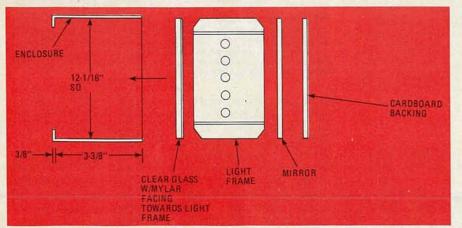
EXPLODED VIEW of infinity mirror. A small notch will have to be cut or filed in the case to pass lines for lamps.
